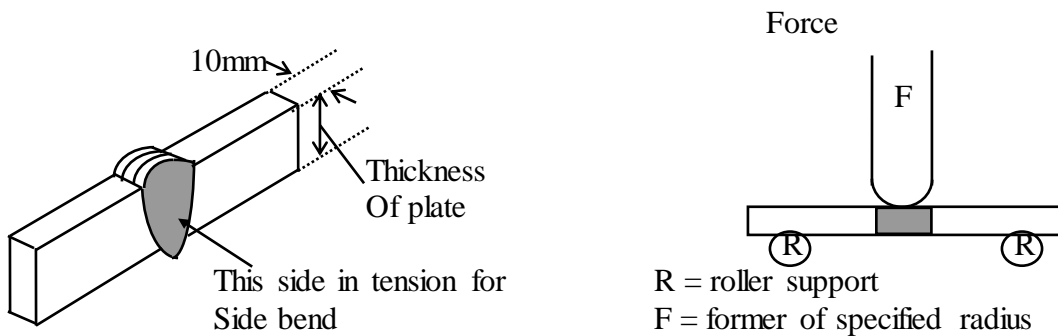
Welded specimens for side bend and root. Face bend
